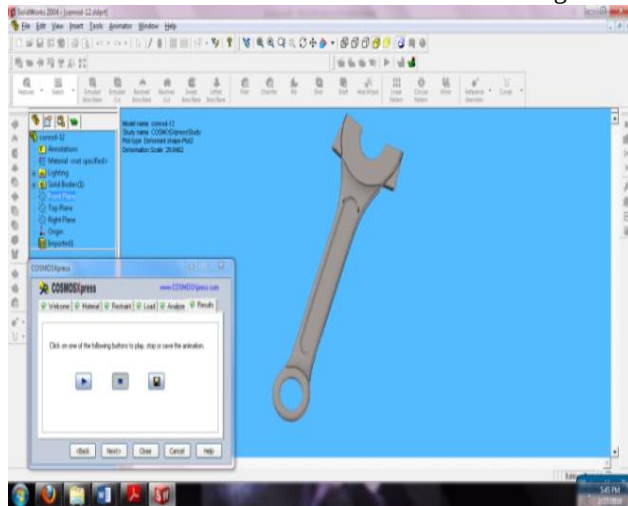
Deformed shape of connecting Rod at 15.74 KN loading
